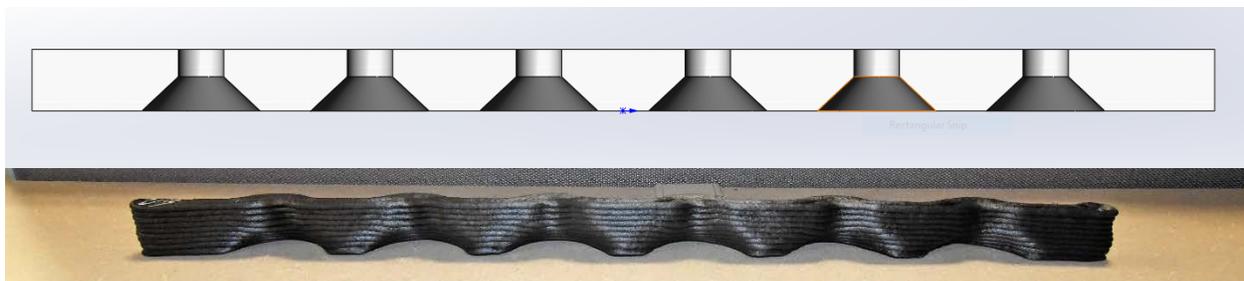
Top, CAD model of a test piece with non-cylindrical pins. Bottom, printed sample pieces without pins filled.
